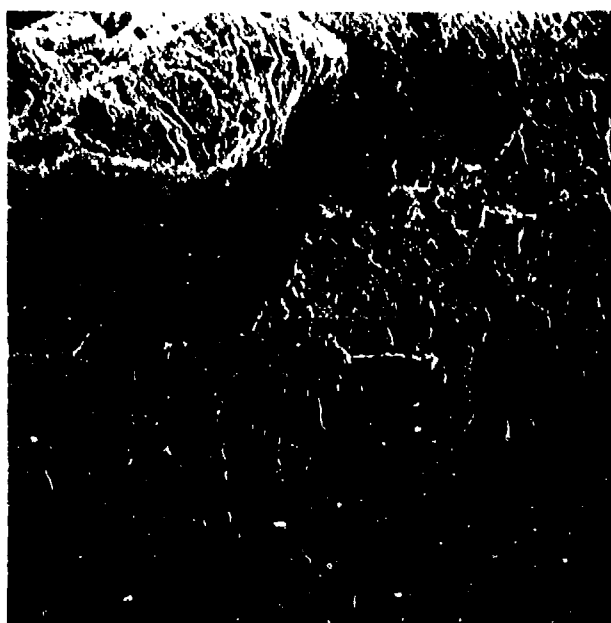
Lamellar tearing occurring in fatigue zone of a temper-embrittled A-514 weld specimen, 150x.
